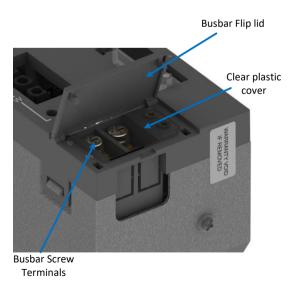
D2109 DC Busbar Screw Terminal Arrangement
